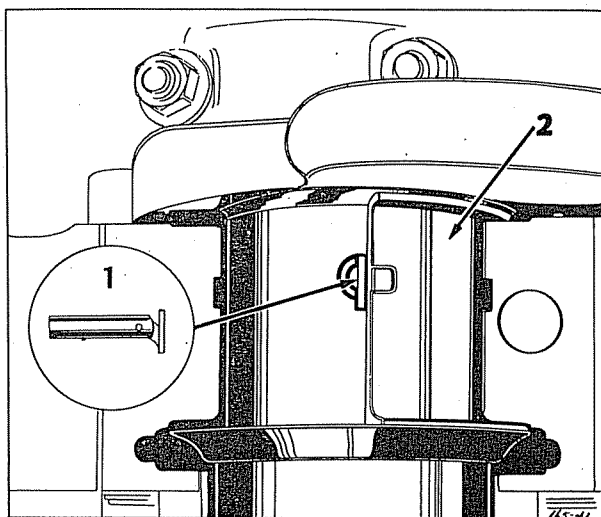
Removing or Installing Upper Bearing Shells with Tool C-584.
